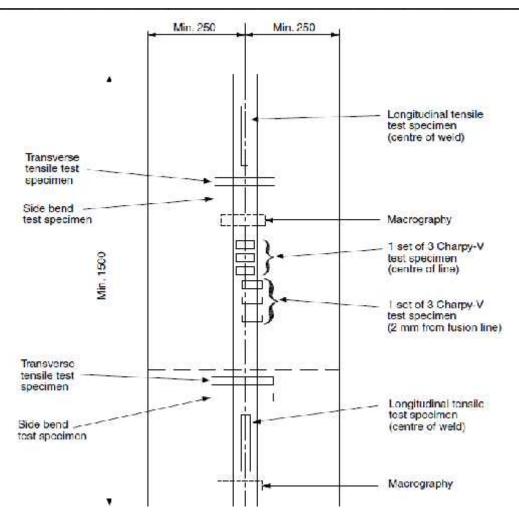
Butt weld test assembly for electro-gas and electro-slag welding
